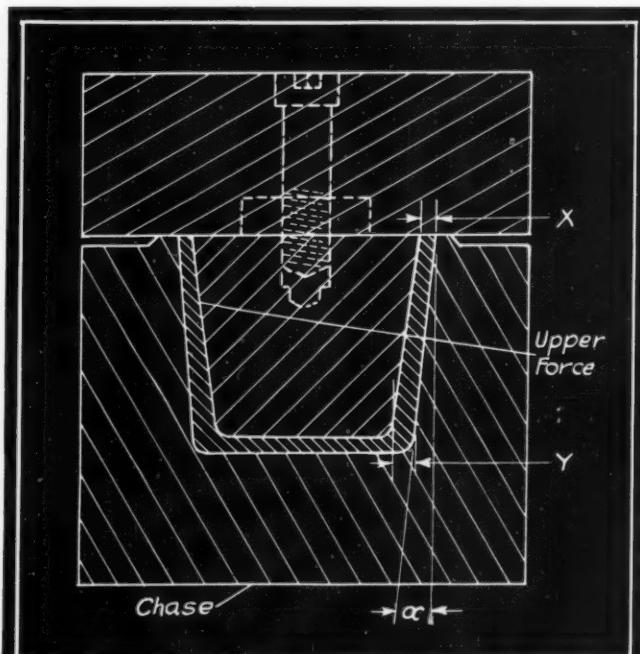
Draft or taper is determined by the direction the piece is pulled from the mold, hence mold construction determines where allowances for draft must be made. Draft angle is indicated above
